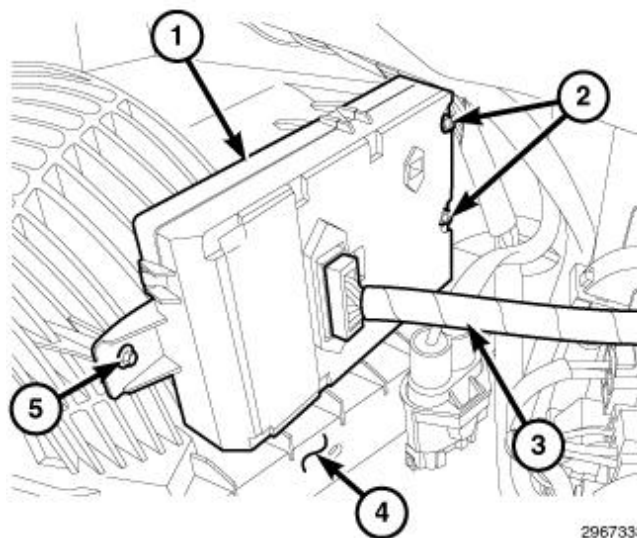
Wire Harness Connector, A/C Heater Module & Air Inlet Housing
